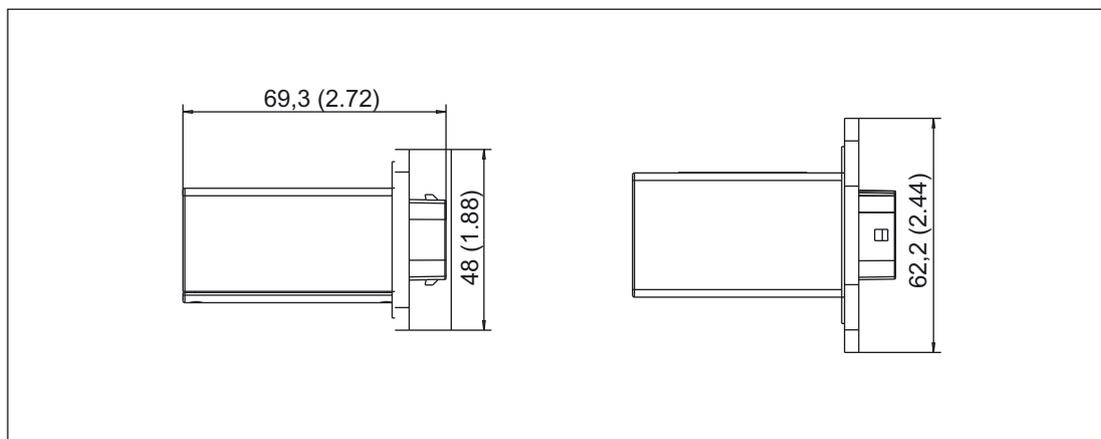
Dimension drawing, DRIVE-CLiQ cabinet gland
